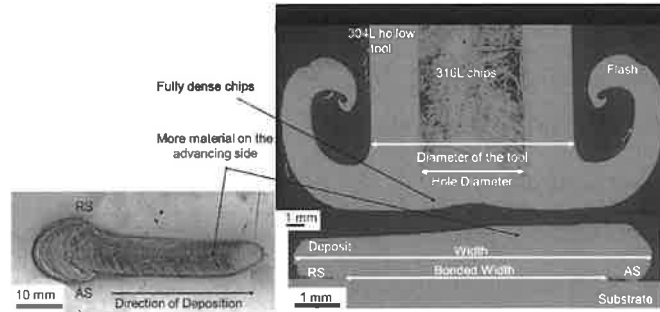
(a) Coating with chip filled rod (b) cross section of the chip filled rod and tool
